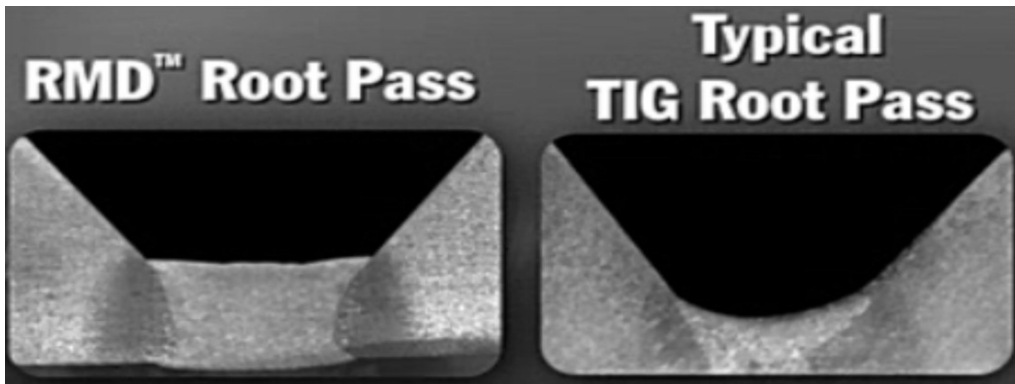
Cross section of RMD-GMAW & GTAW test specimen
